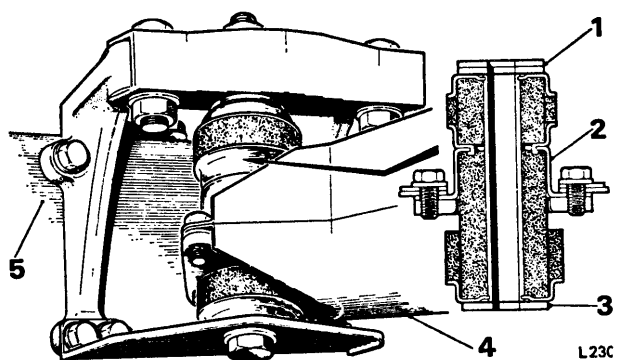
REAR SUSPENSION CROSS-MEMBER MOUNT
